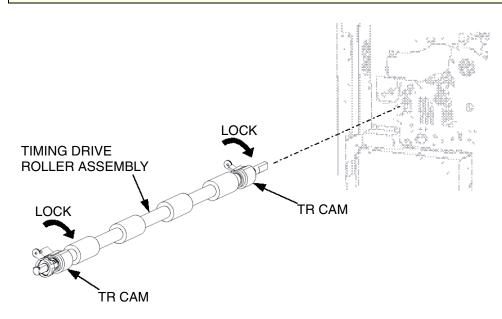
Assembling of the Timing Drive Roller Assembly
